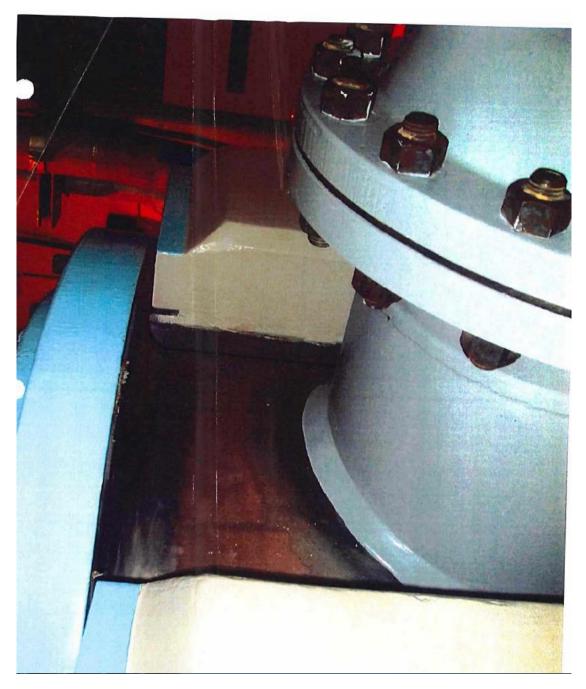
Weld 1-CP-206-CSP-W2 Limitations
